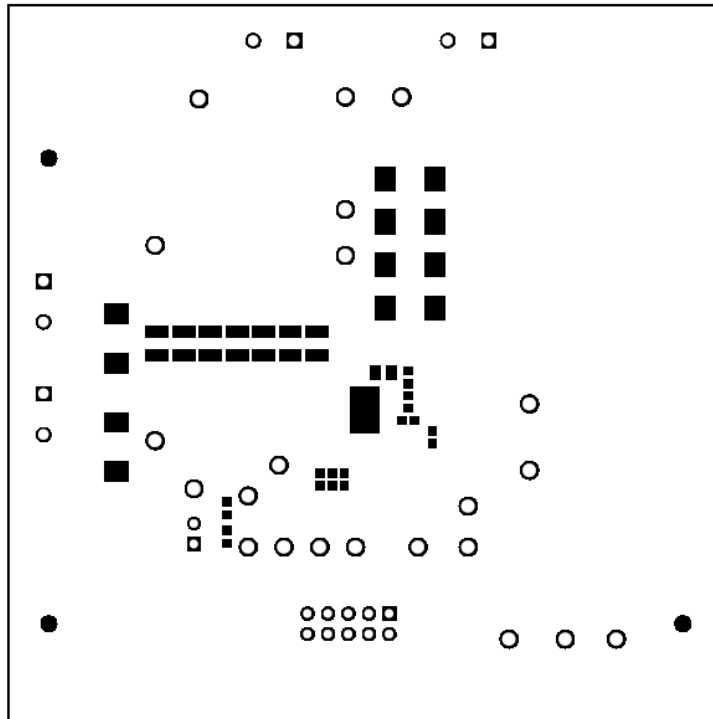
PWR-784EVM Bottom Solder Mask (Top View)
